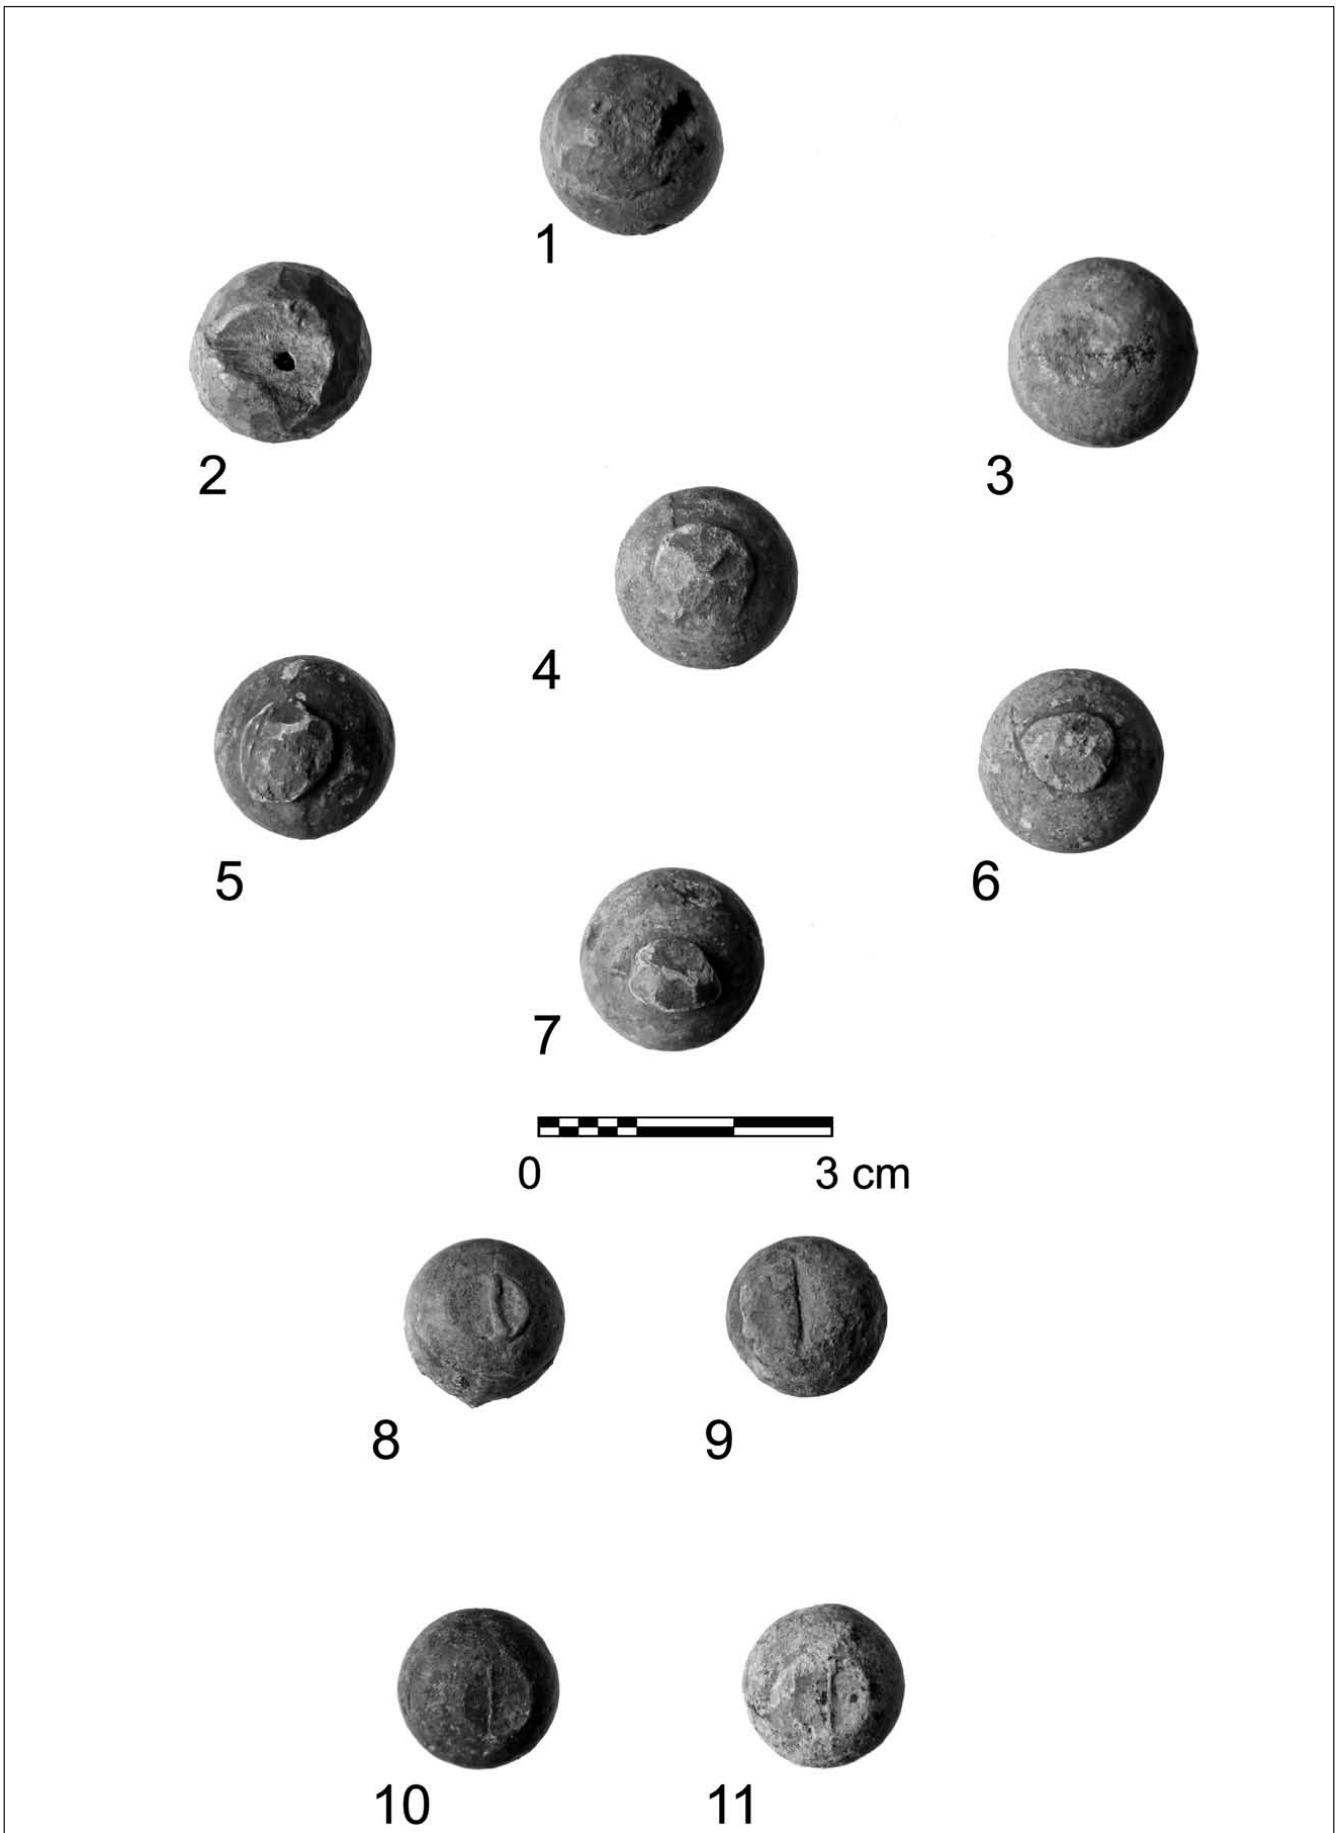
Casting sprue removal methods: 1, 4-7 – hammering; 2, 3 – cutting; 8-11 – pincers. Photo by P. Kobek.
